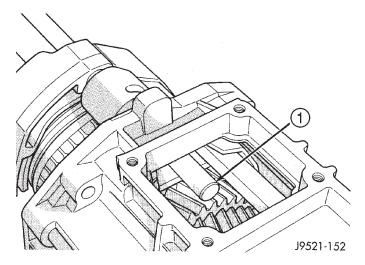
Inserting Shaft Into Lever Opening In Housing
